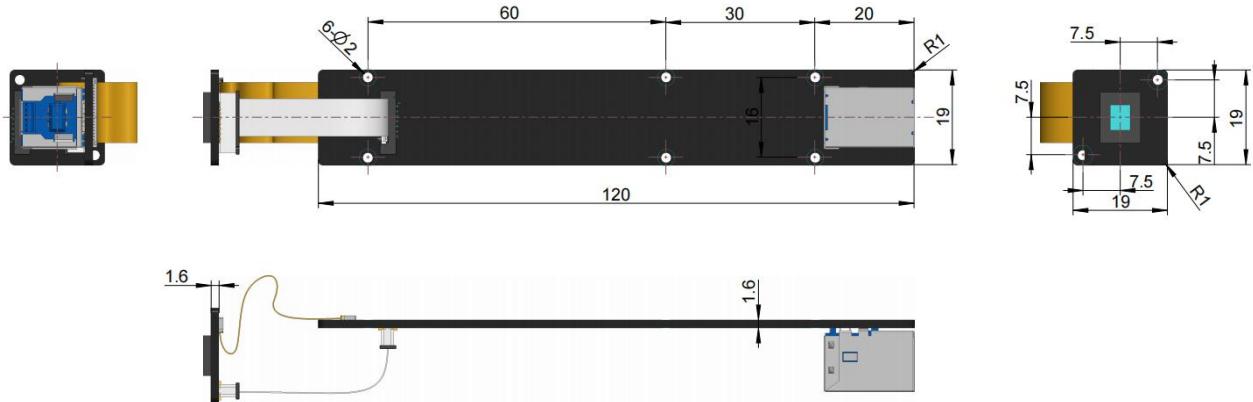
48 Dimensions of OEM4 circuit board (mm)
